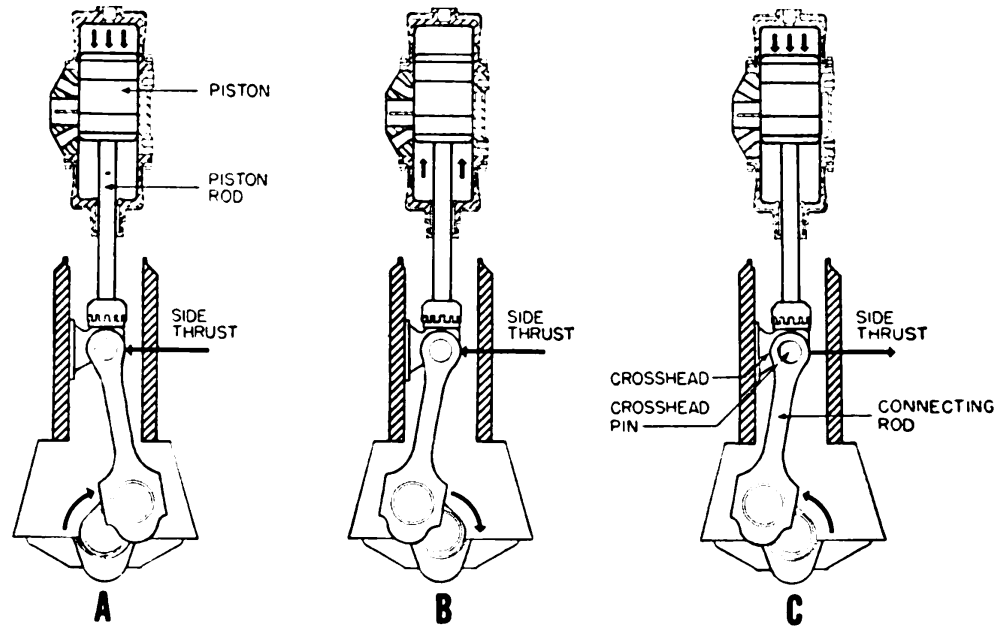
Side thrust in the cylinder of a double-acting engine.
